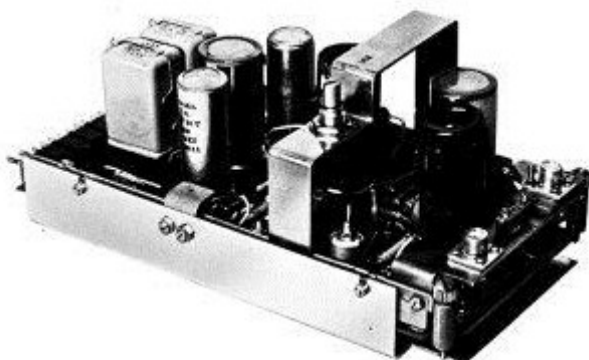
An early design using a printed wiring board which supported valves, relays and large capacitors
